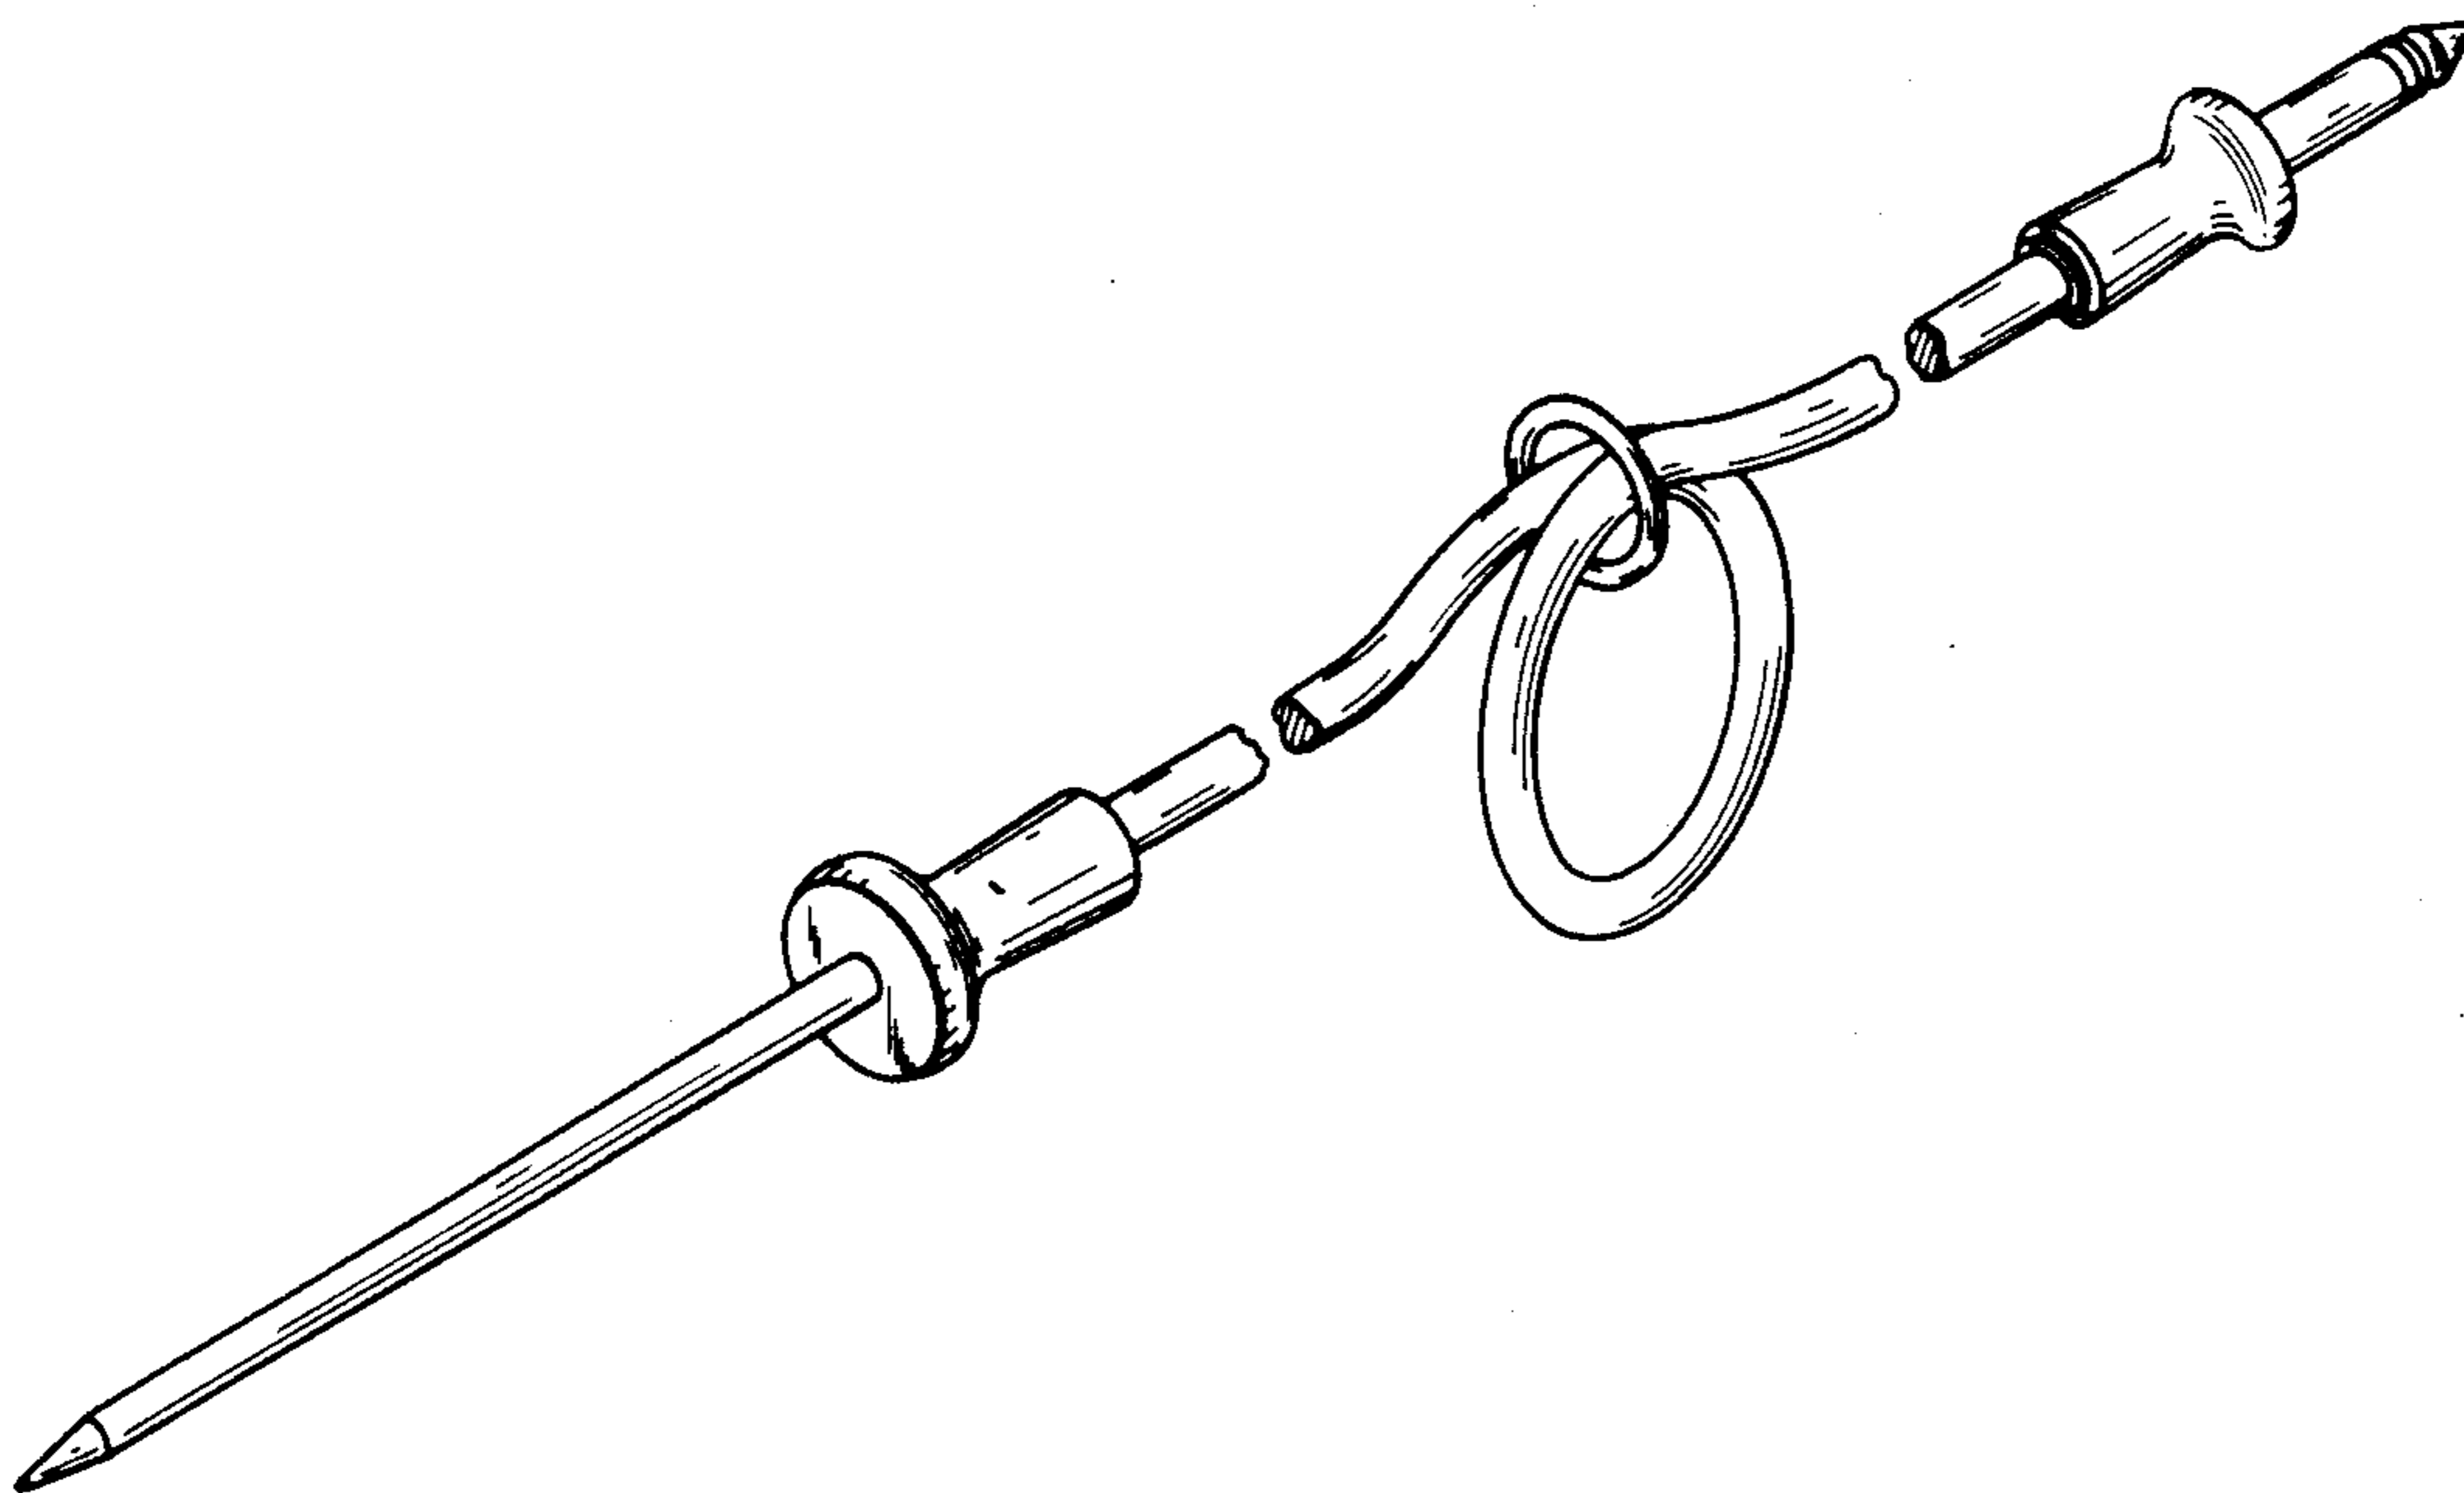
is a side perspective view of a view of a food temperature sensing probe assembly showing my new design with portions broken away to illustrate indeterminate length;
